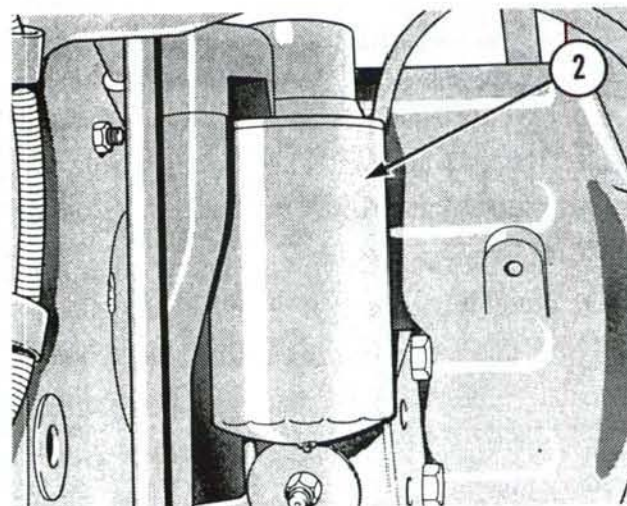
View of auxiliary hydraulic filter installed on models with tandem gear pump and engine mounted auxiliary pump. Filter is located on left side under floor.
